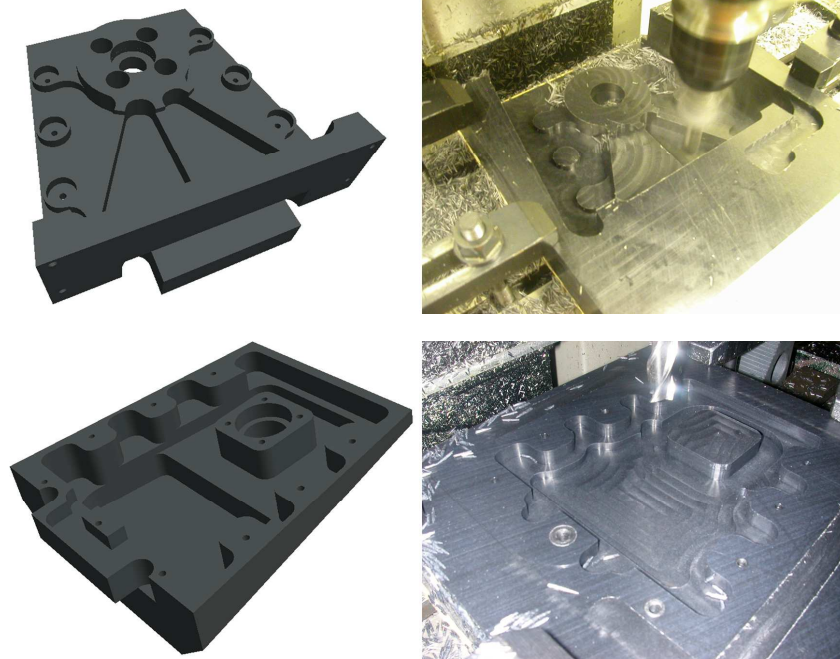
MACHINING OF TAIL UNIT COMPONENTS
